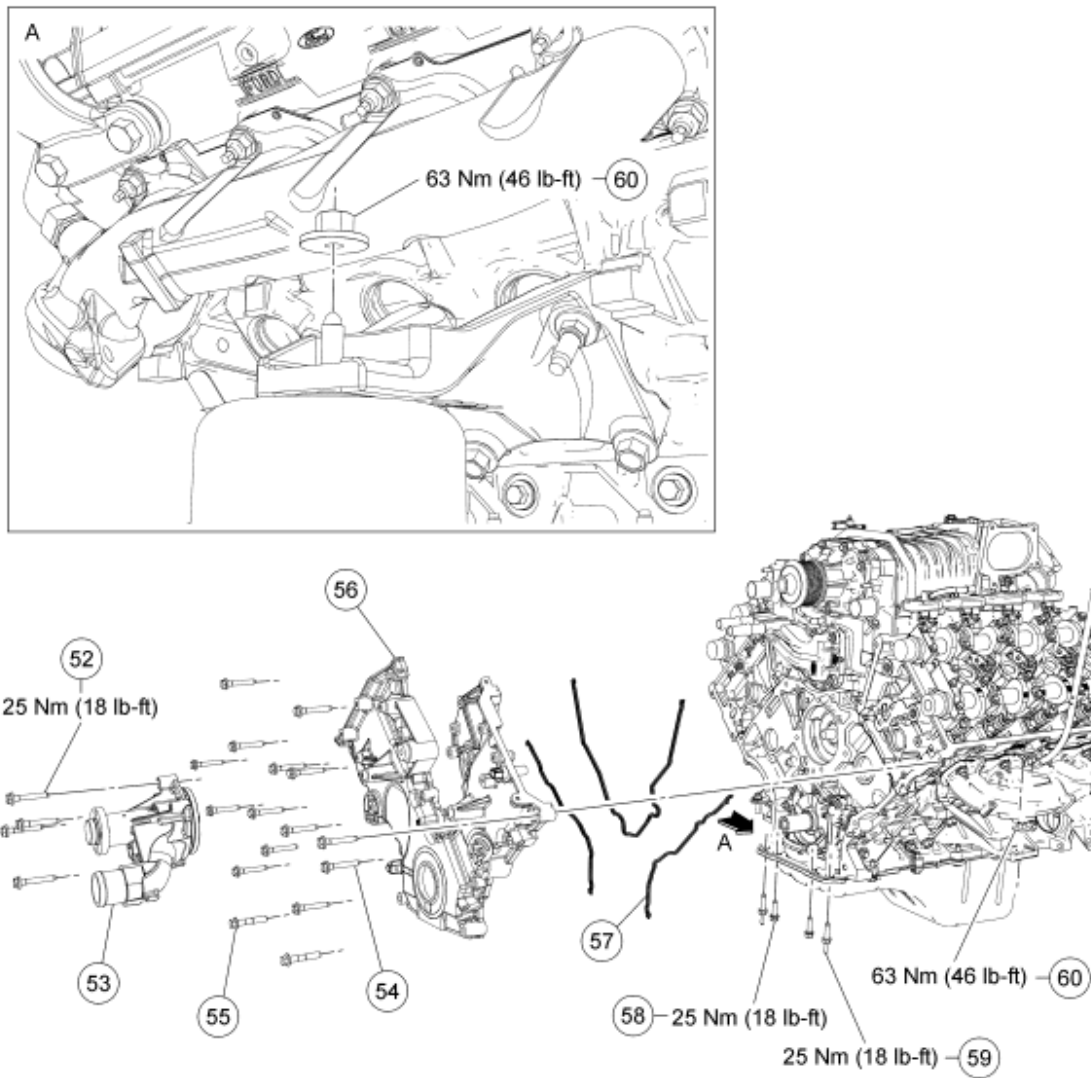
Exploded View Of Engine Front Cover With Torque Specification (3 Of 4)
